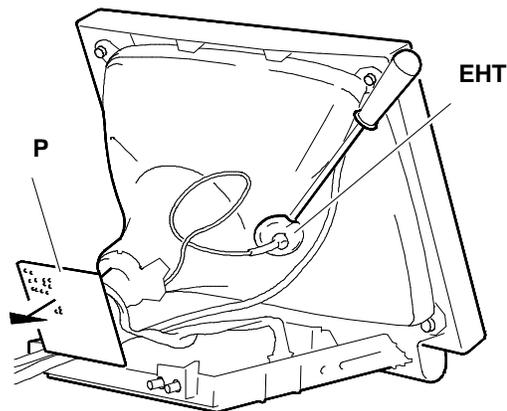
Video pre-amplifier board and EHT cable removal
